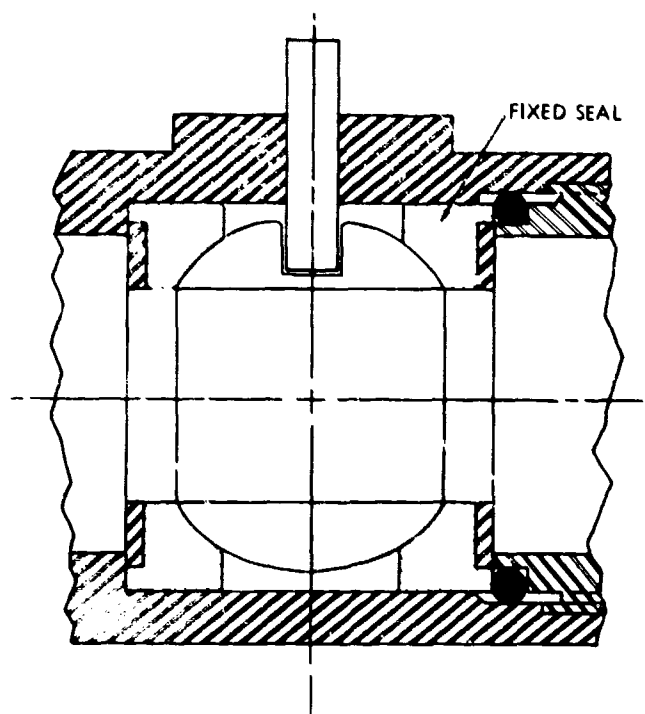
Reduced Port Ball Valve With Floating Ball
